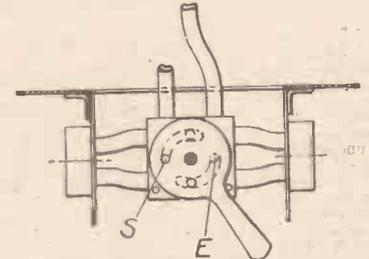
Front view of steam block and connecting pipes, explaining the function of the reversing plate.
